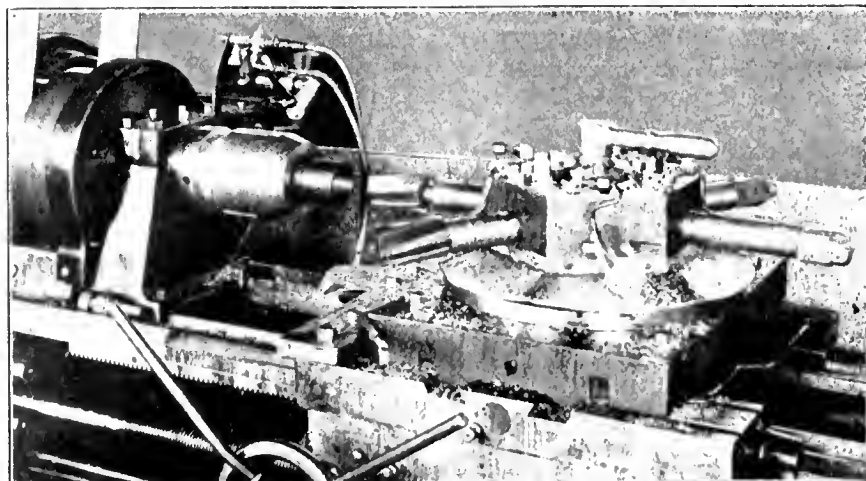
SPECIAL TURRET FITTED TO ENGINE LATHE
